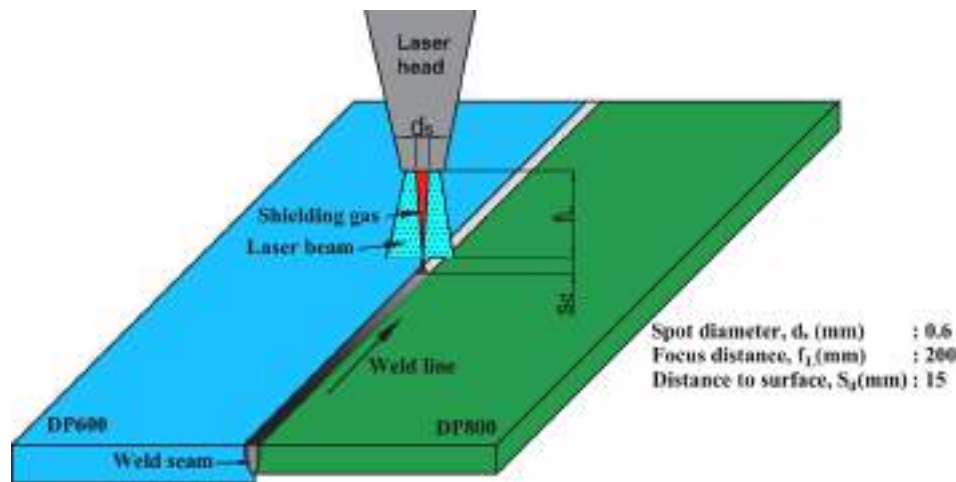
Schematic representation of the CO₂ laser welding process.
